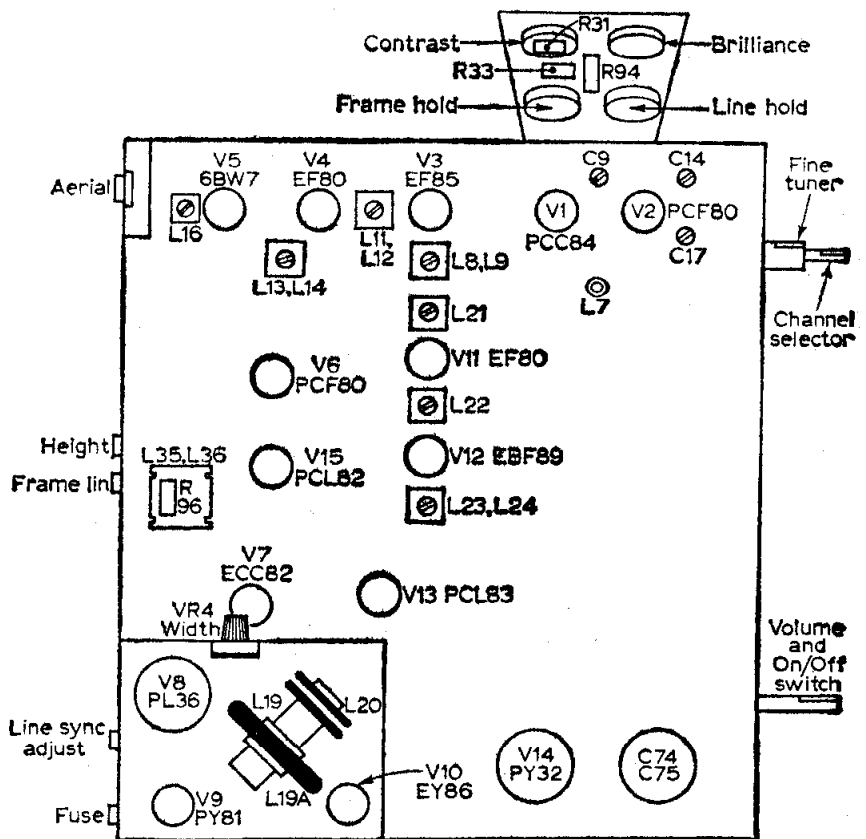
A general above-chassis view of the receiver, showing the positions of the larger components.
